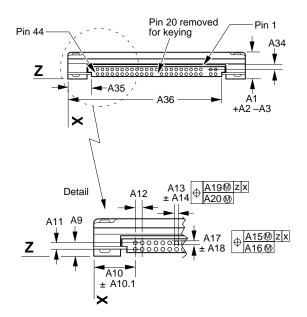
Drive mounting dimensions—end view (for dimension specifications, see table below).
